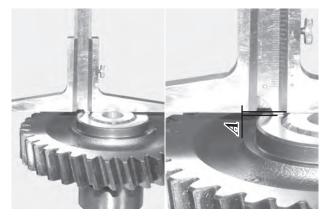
Insert gear on shaft and, determine the measure "A".
